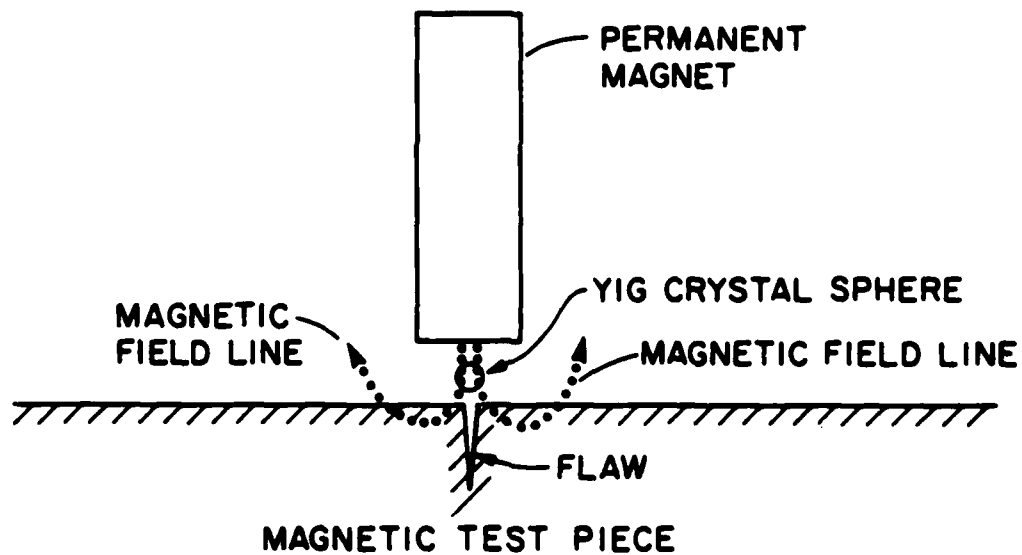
FMR Probe Detection of Surface Cracks in Magnetic Work Pieces.
